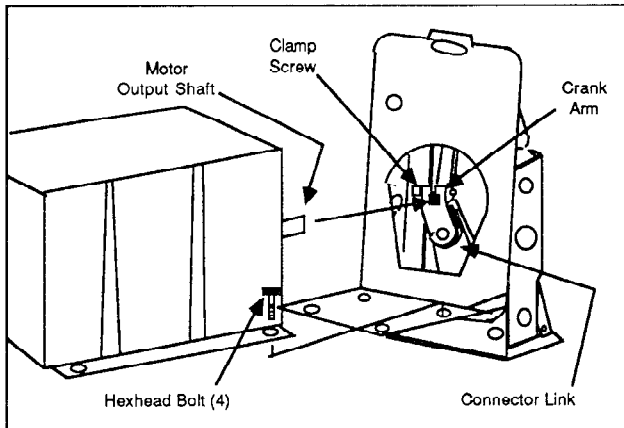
Mounting the Modular Motor on Q601 Valve Linkage
